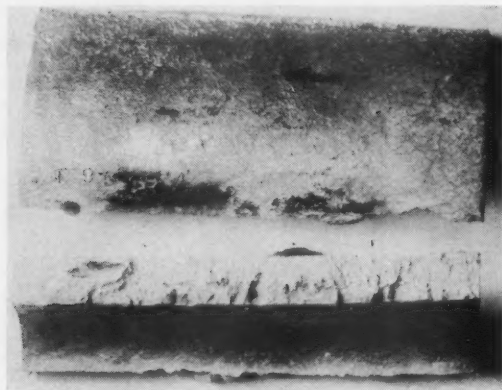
FRACTURE OF A BUSHING CAST IN THE FEDERAL SPECIFICATION ALLOY WITH 2.5 PER CENT LEAD INSTEAD OF 5.0 PER CENT.
